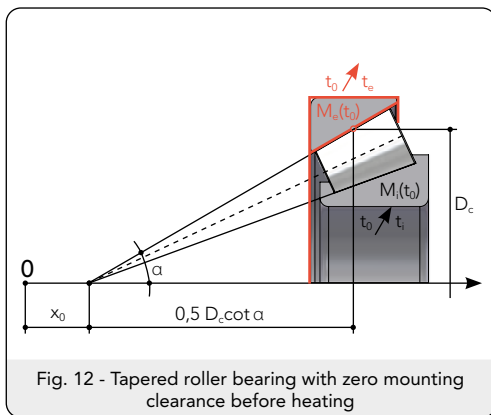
Tapered roller bearing with zero mounting clearance before heating
